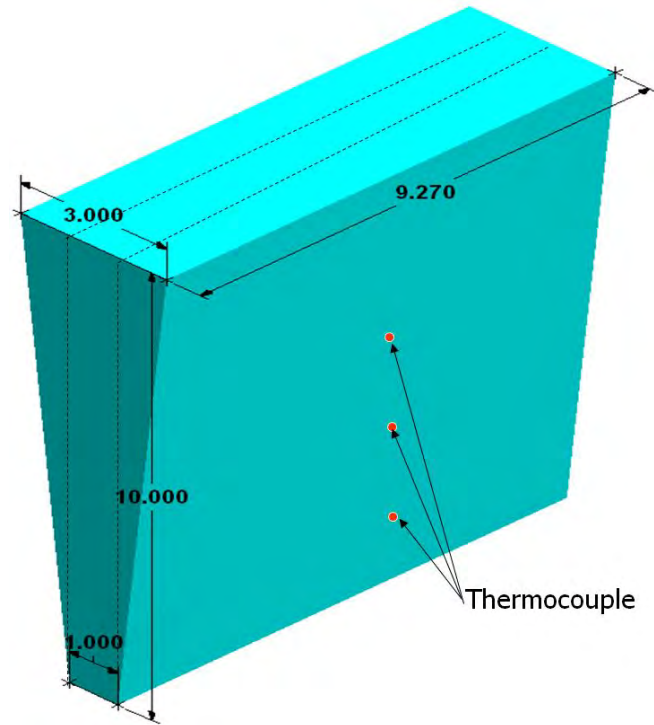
Wedge Casting Used for Open Cavity and Lost Foam Castings
